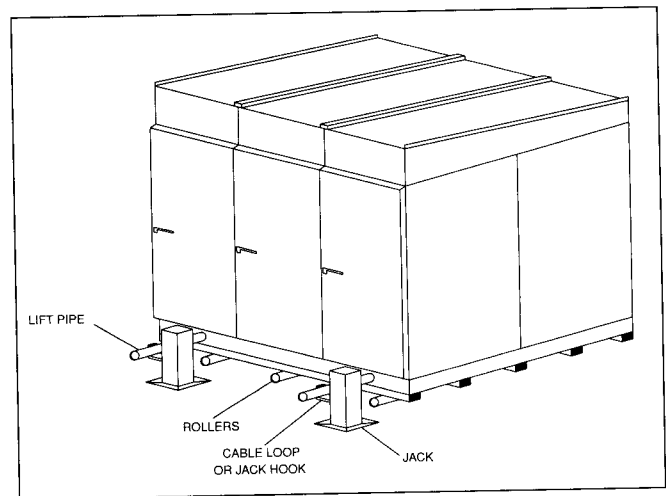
Moving Outdoor Switchgear with Jacks and Rollers
